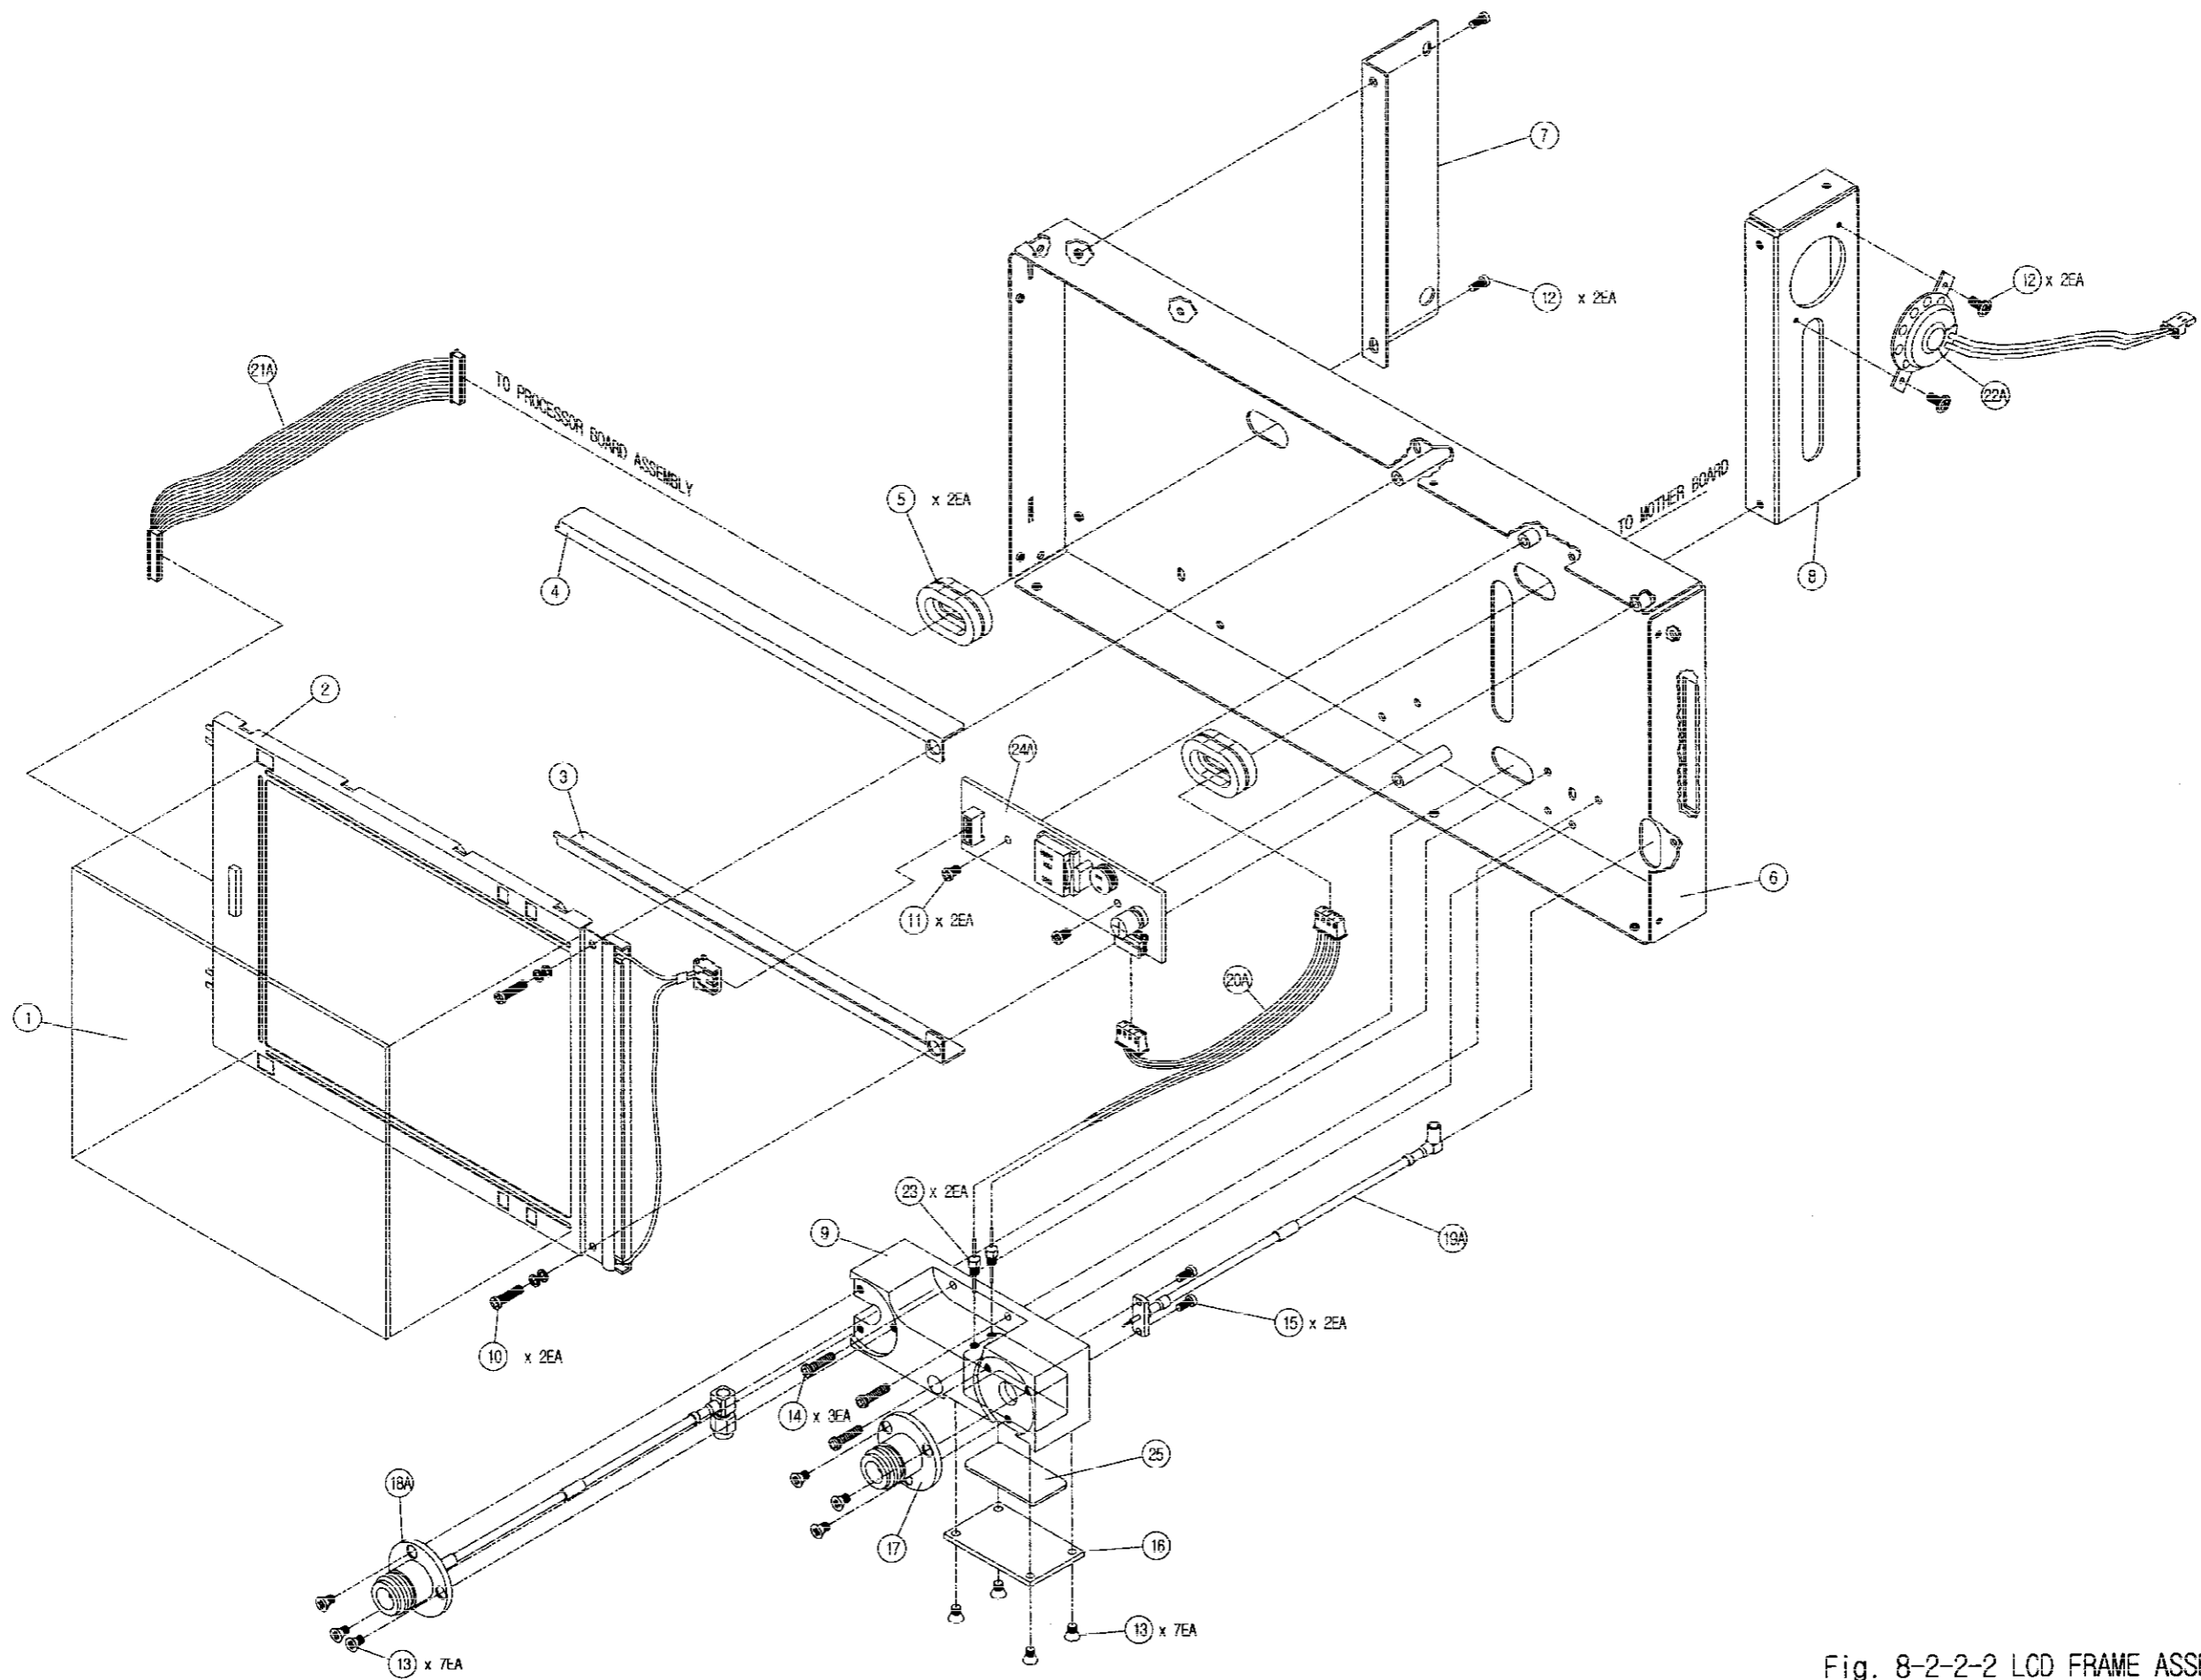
LCD FRAME ASSEMBLY
